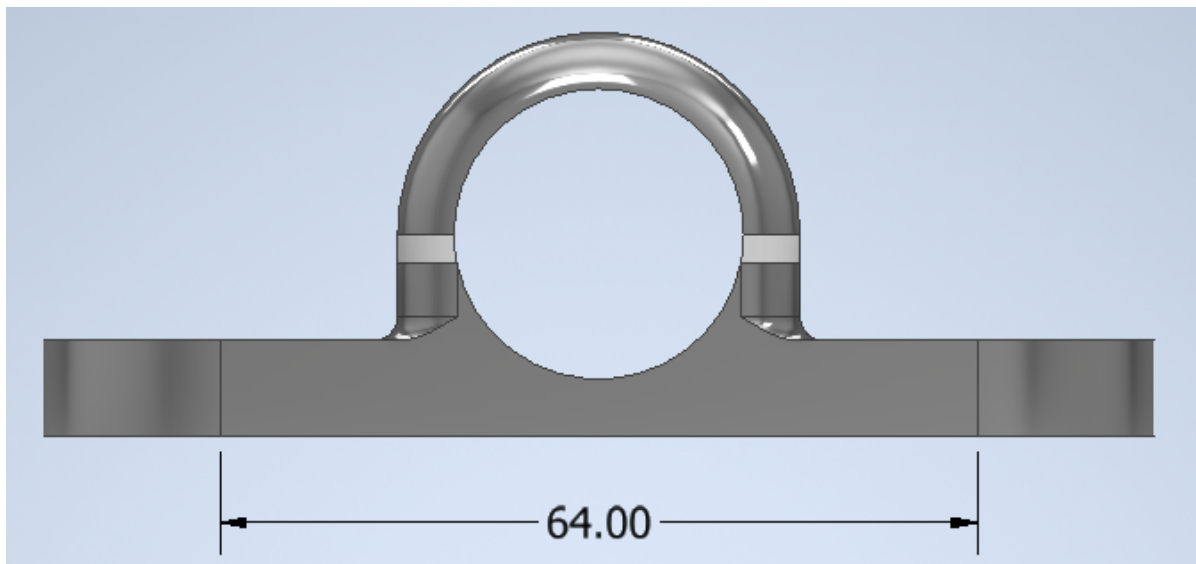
CAD image of the 3D printed mounts for the resistivity sensors. Front view.
